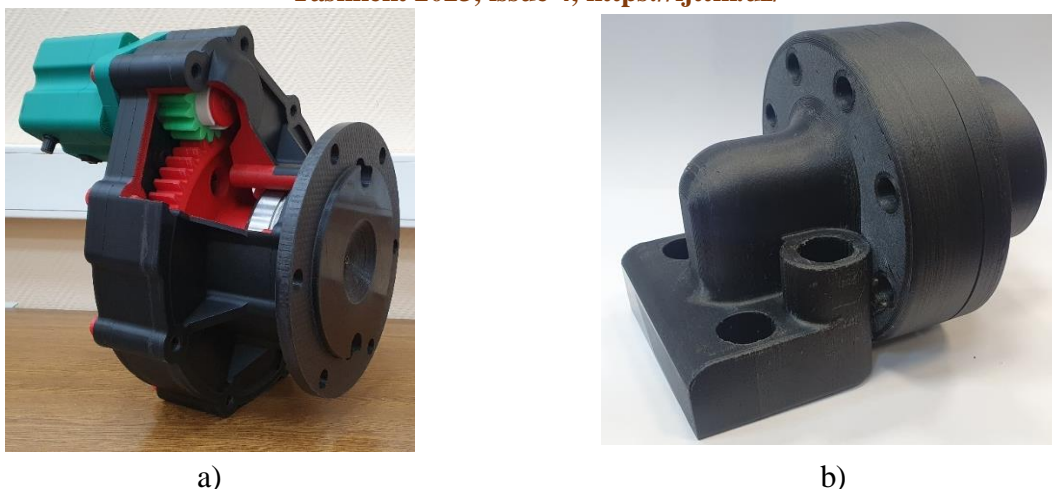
Examples of structural elements of the road machines manufactured with application of reverse engineering methods and 3D printing:
